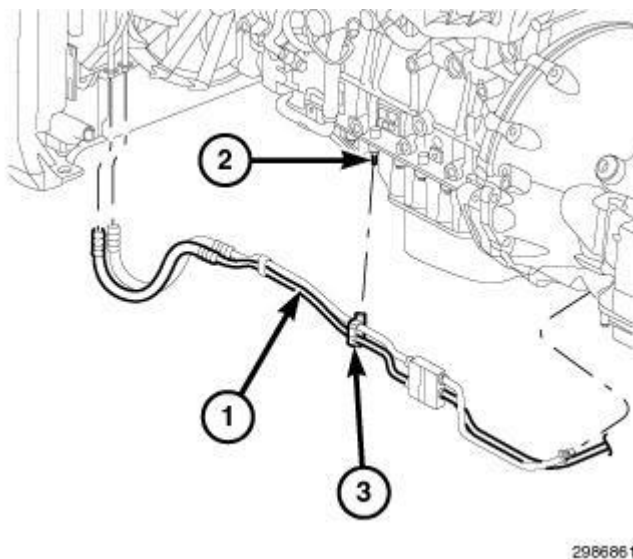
Transmission Cooler Line, Oil Pan Stud & Clip
